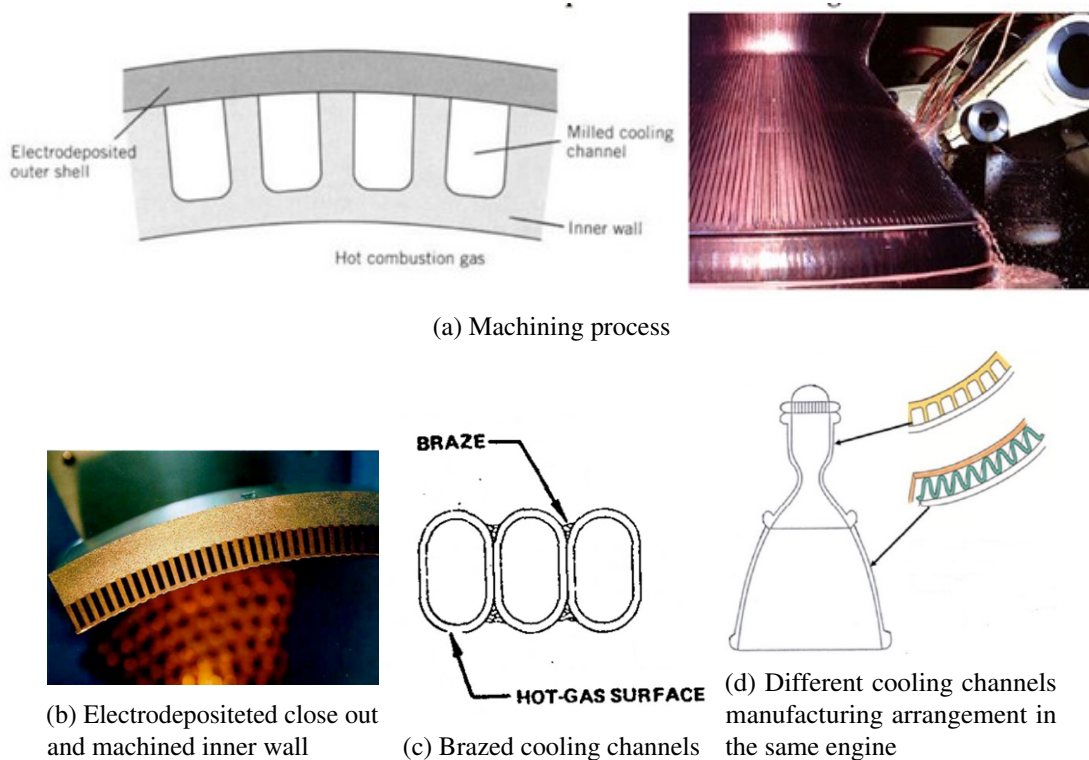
Conventional rocket thrust chambers manufacturing technologies, from [6]
